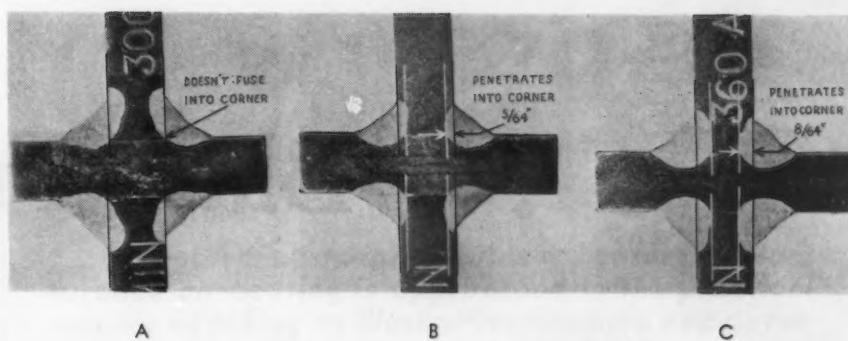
Three cross-sectioned fillet welds in 1/2-in. plates illustrating the new technique. The plates at the left were welded by conventional methods with 300 amp. at a speed of 7 in. per min. The center view shows the effect of increasing the arc speed to 10 in. per min., using the same current. By stepping up the current to 360 amp. and using an arc speed of 12 in. per min., the welds shown at the right were obtained. All were welded in a horizontal position, with direct current and the electrode negative.
